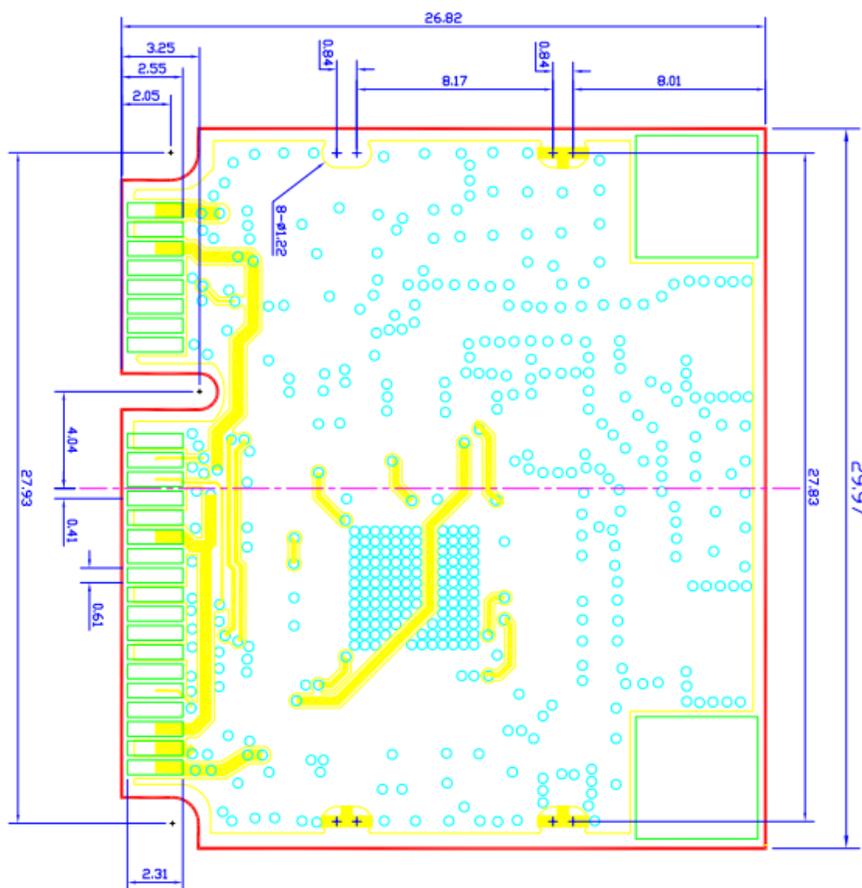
WIFI-RT3593-DB Dimensions (mm)
